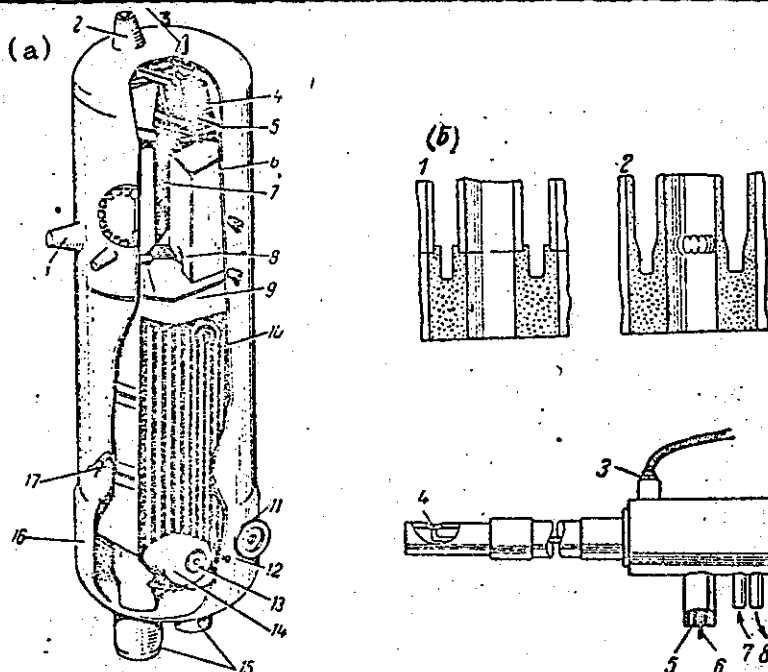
Valiant's steam generator and the schematic for welding the tubes. a - steam generator: 1 - feed water inlet; 2 - live steam outlet; 3 - to safety valve; 4 - herringbone separator baffles; 5 - separating baffles; 6 - cyclone separator; 7 - condensate collector; 8 - feed collector; 9 - outlet chamber; 10 - tube nest; 11 - port in steam generator housing; 12 - thermocouple; 13 - port to water collector; 14 - primary coolant collector; 15 - fittings for coolant inlet and outlet; 16 - steam generator housing; 17 - low rate measuring device; b - schematic for welding the
